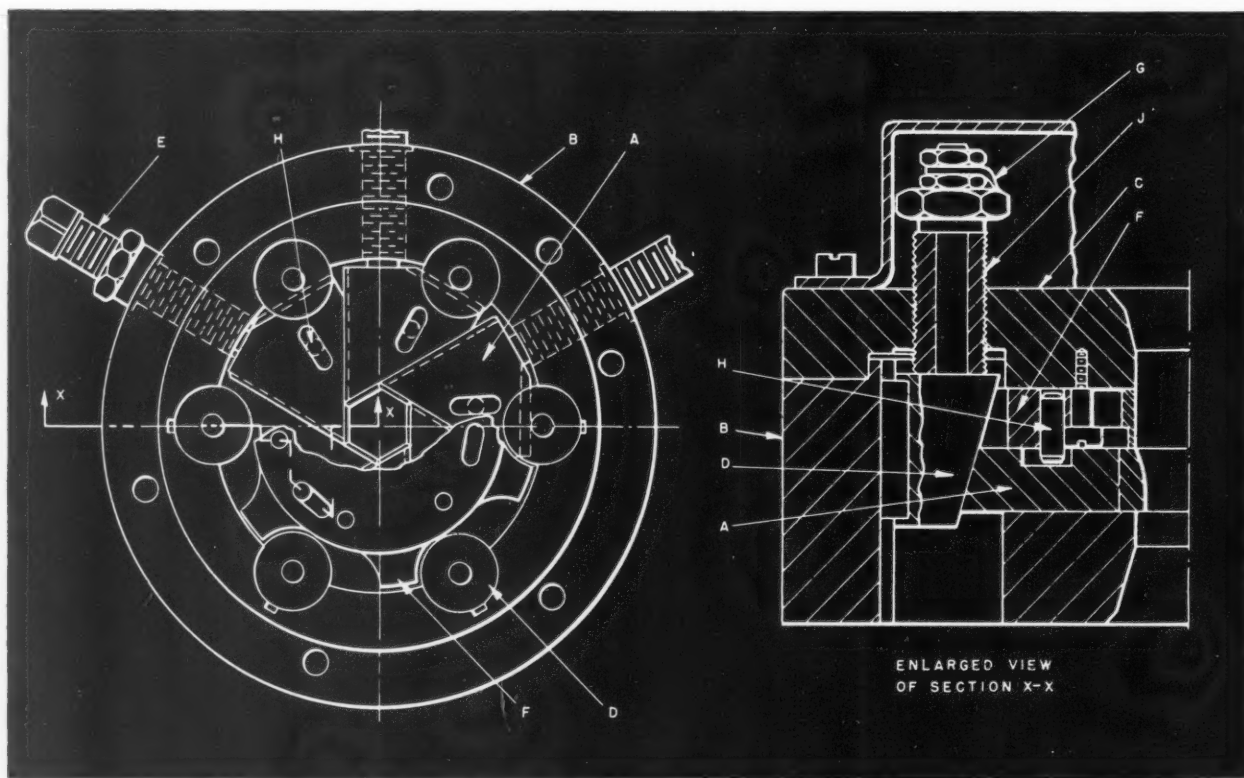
Plan view and enlarged cross-section of the die illustrated in Fig. 1, showing the arrangement of the various components
